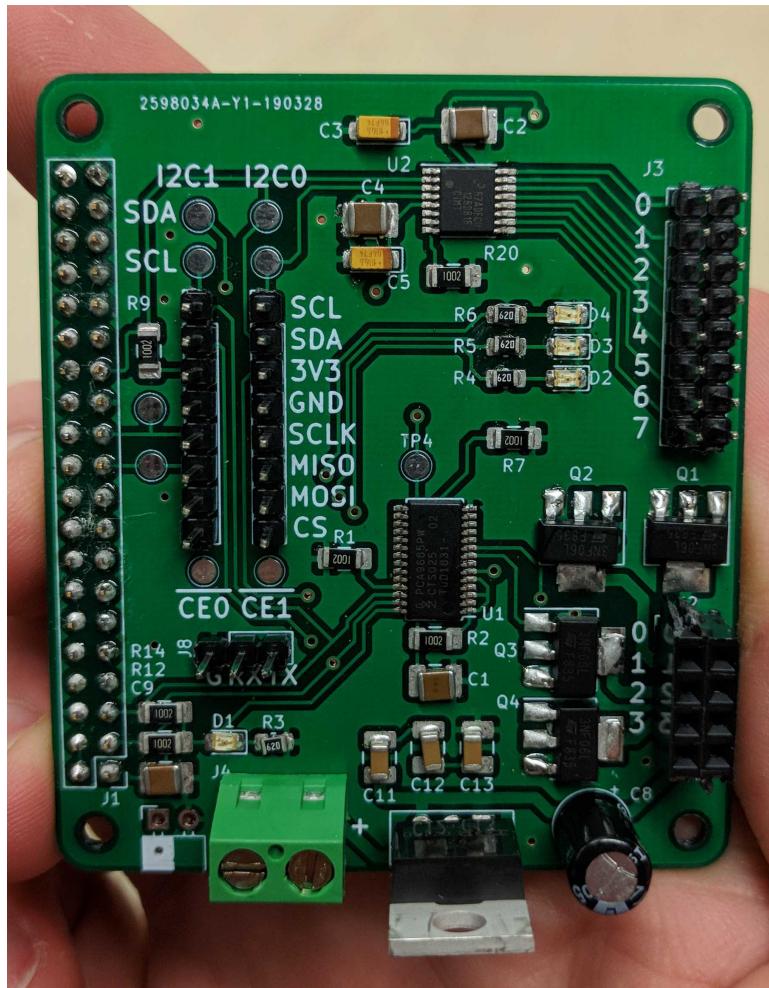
The completed Raspberry Pi breakout board. Top IC: ADC, Middle IC: PWM Generator, Bottom Right: MOSFETS. A render of the PCB design is show in Figure 22.
